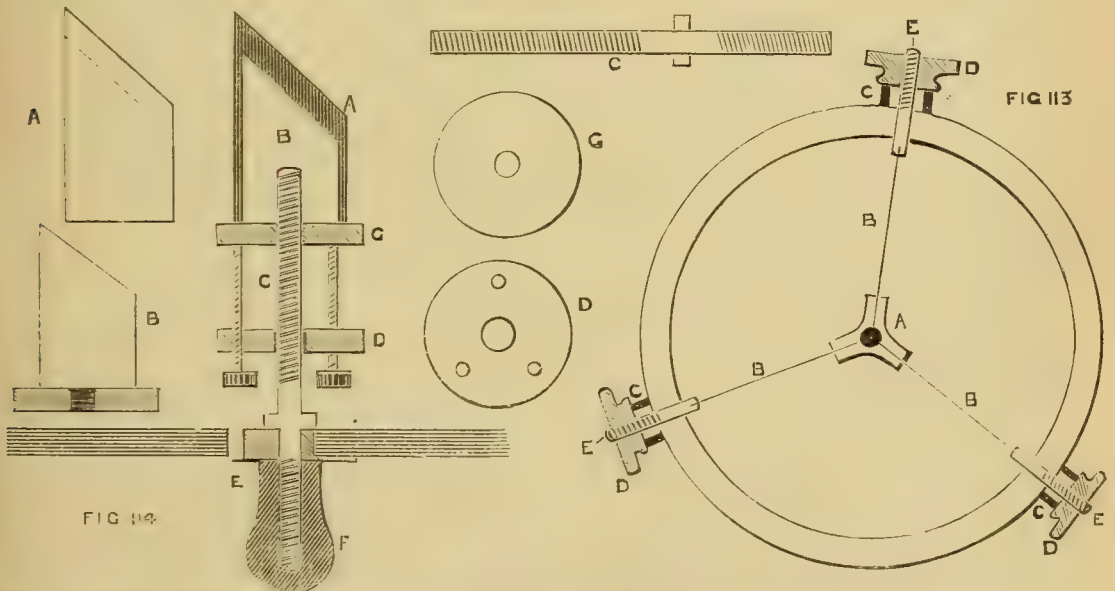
THE SUPPORT FOR FLAT MOUNT—A, Brass Centre Piece, about $\frac{1}{2}$ inch thick; B, B, B, Steel Band; C, Short Length ($\frac{1}{2}$ inch), of Brass Tube; D, Nut with Milled Edge working on E, Squared Rod, with Screw Thread cut on end. FIG. 114.—FLAT MOUNT—A, Outer Tube to take Flat; B, Inner Tube or Wooden Block to hold Flat in Position; C, Screwed Rod, fitting tightly into G, and loosely into D, a Metal Disc pierced for three Milled Head Screws; E, see A, Fig. 113; F, Leaden Counterpoise screwing down Rod, C, and fastening whole Mount rigidly to Brass Centre, E; G, Brass Disc drilled and tapped for E, and carrying the Inner Tube, B.
